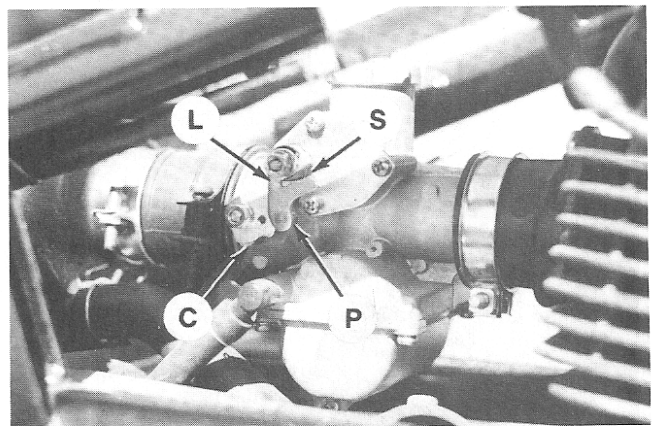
On Keihin carburetors with fast idle circuit, adjust clearance between cam (C) and link pin (P) by increasing or decreasing slot (S) width in link (L) as outlined in text.
